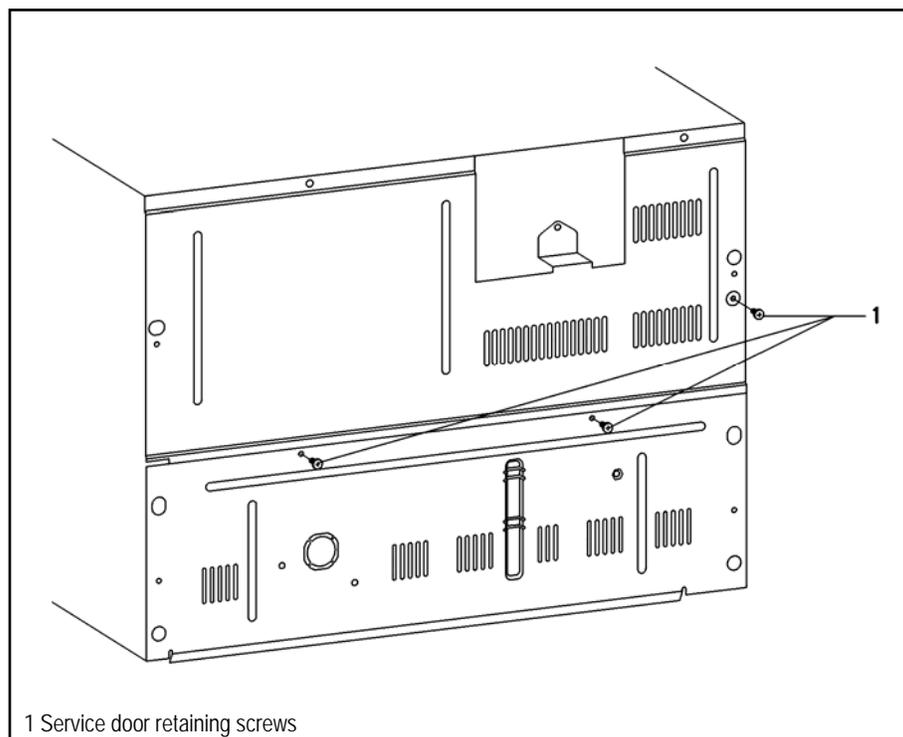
CVA4070 Rear Service Door Screw Removal
